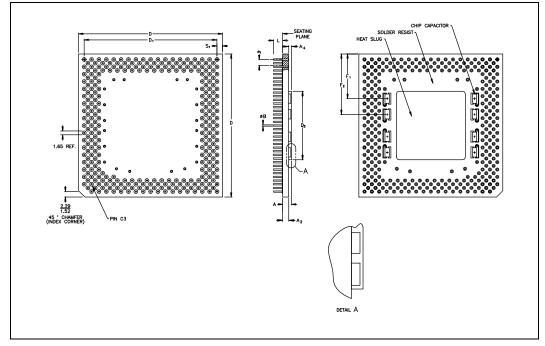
Mobile Pentium® Processor with MMX™ Technology PPGA Package Dimensions
